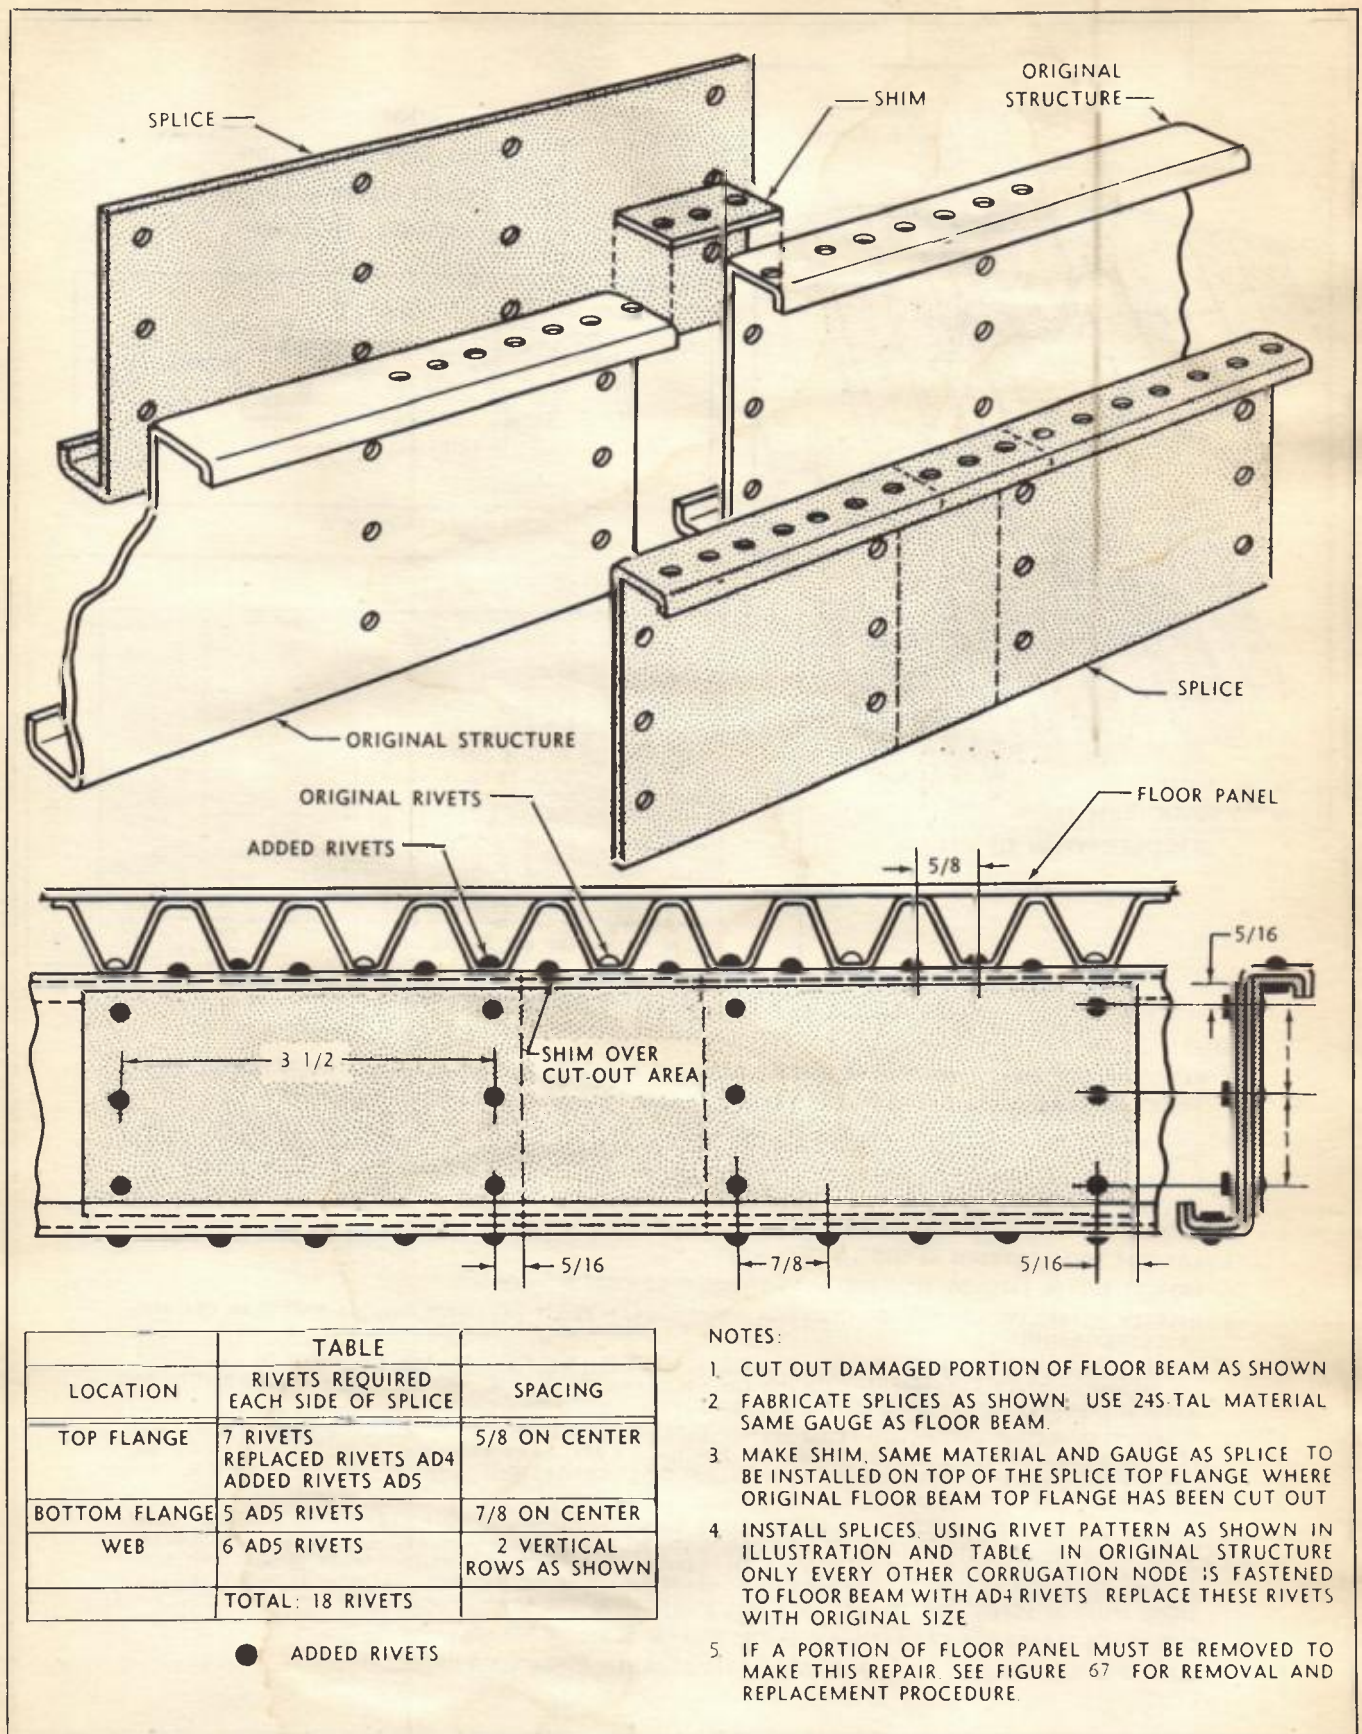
Fuselage Floor Beam "Z" Section Repair
